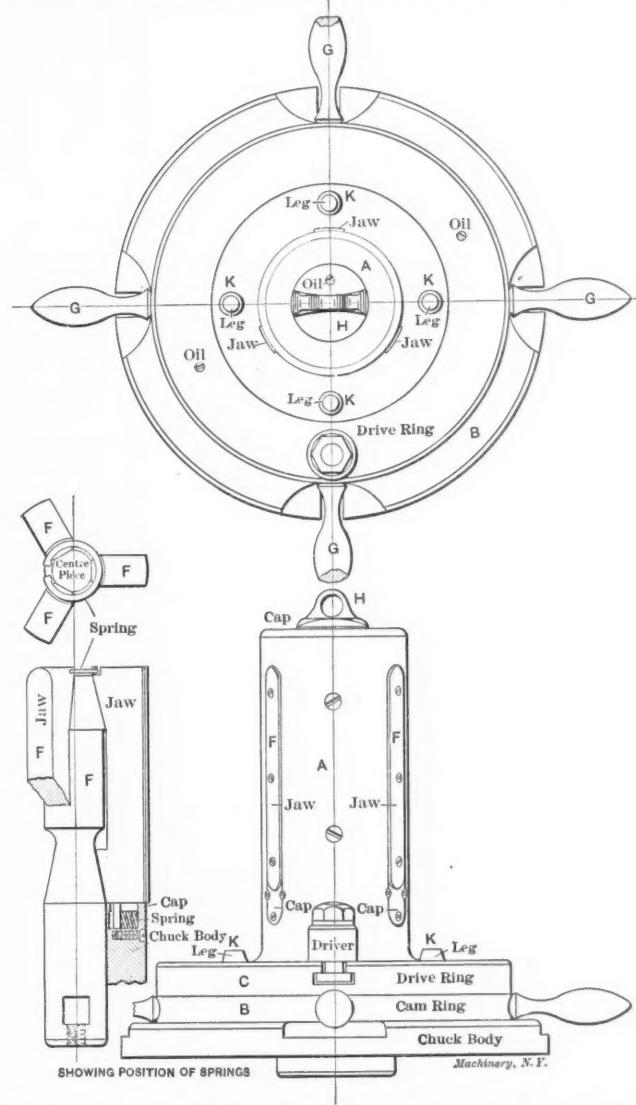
Center Piece with Jaws and Springs in Position. Fig. 2. Plan and Elevation of Assembled Chuck.
